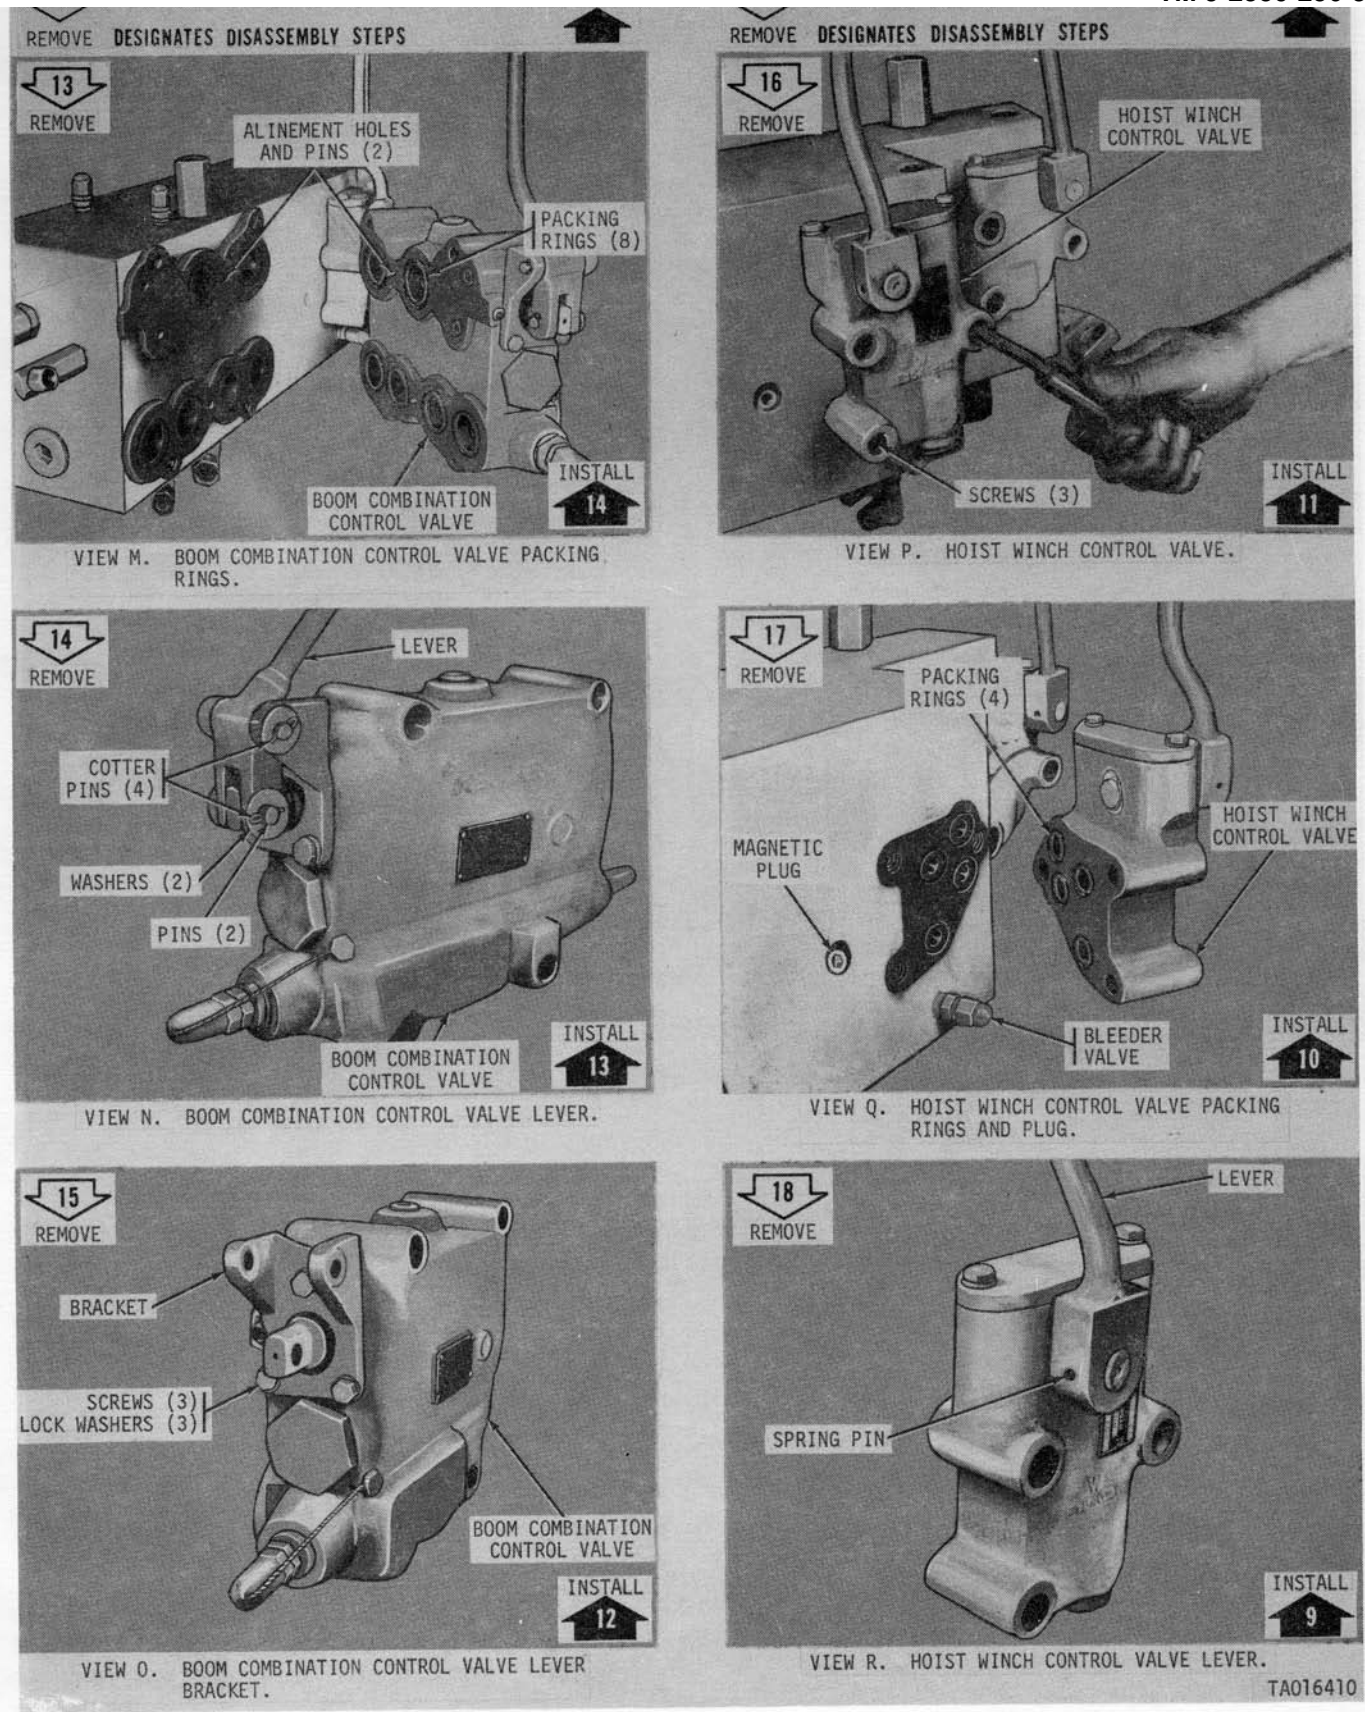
Disassembly of hydraulic subplate assembly into subassemblies (Sheet 3 of 5).
